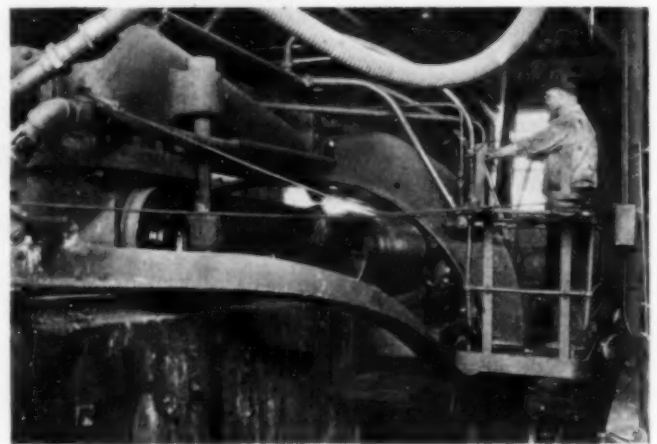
Horizontal Welder Heating 1-Ton Container Preparatory to Welding; Note Upper Welding Roll at Left of Furnace; Lower Roll and Furnace Supported on Horn Inside Tank
